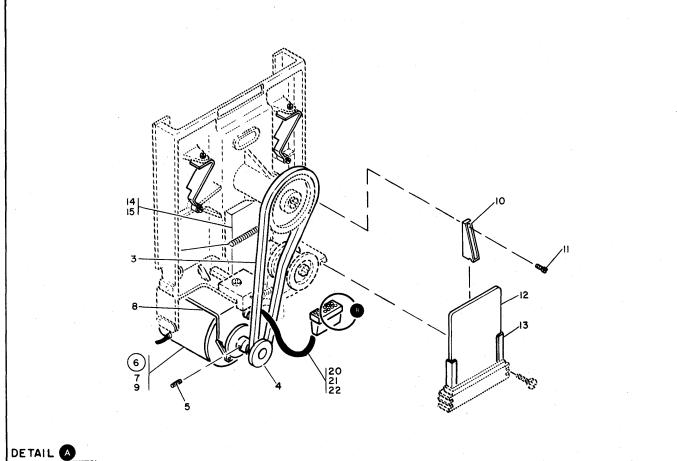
1 SIDED DISKETTE DRIVE ASSEMBLY. SEE LIST 7.
